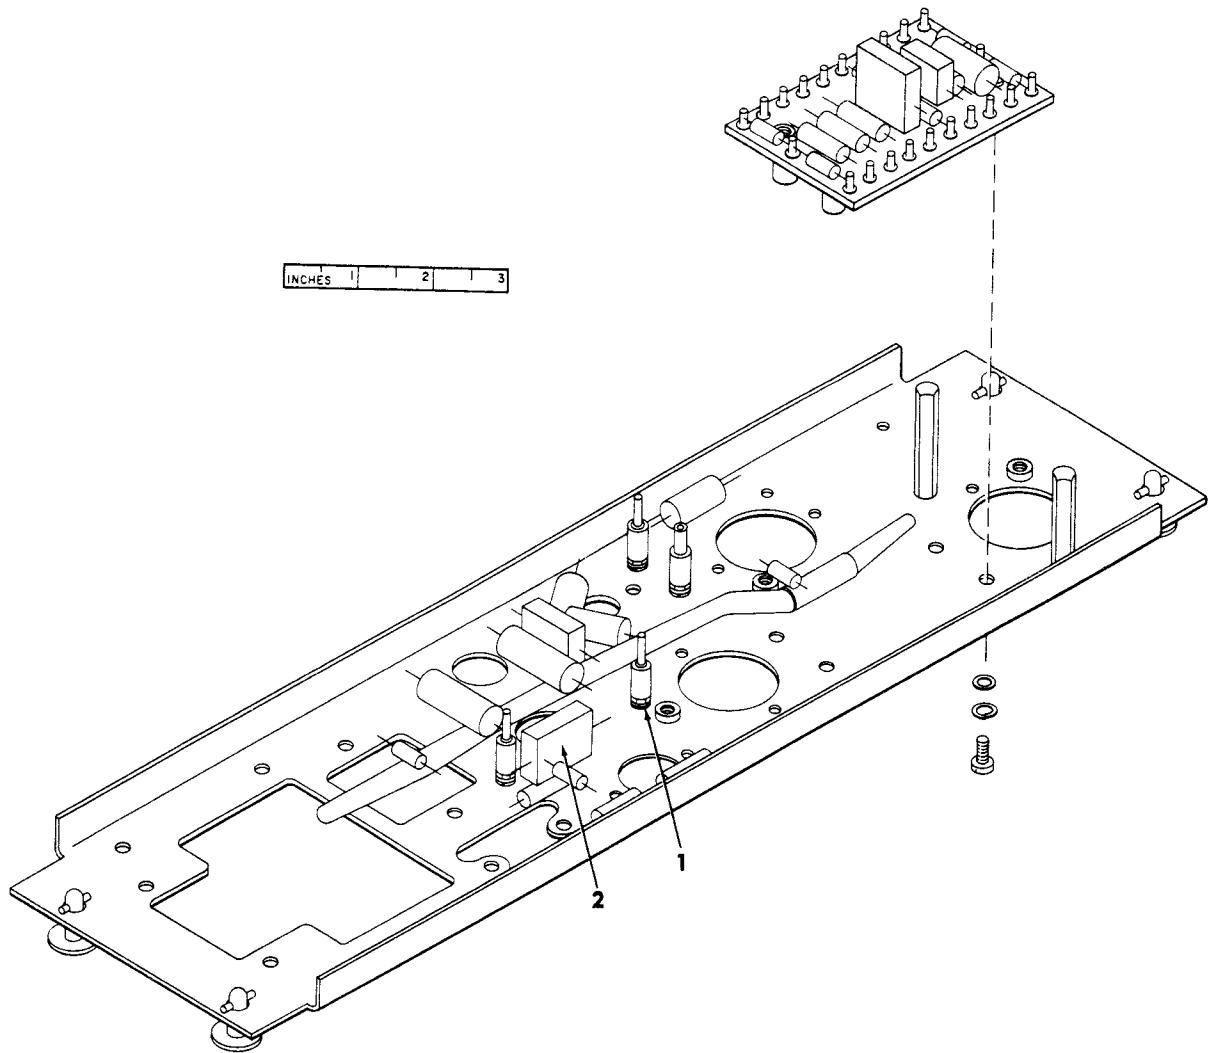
Regulator, voltage CN-280/M (9137641)—partial exploded view
